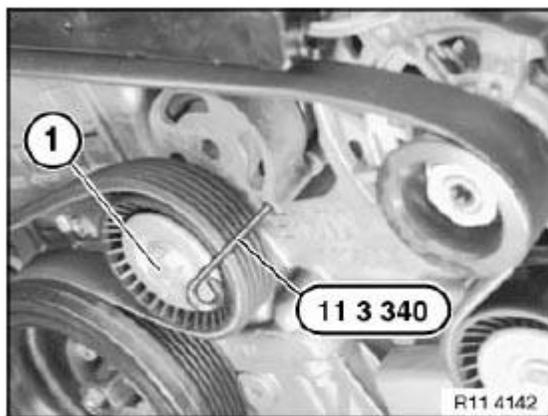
Identifying Belt Tensioner With Special Tool (11 3 340)
